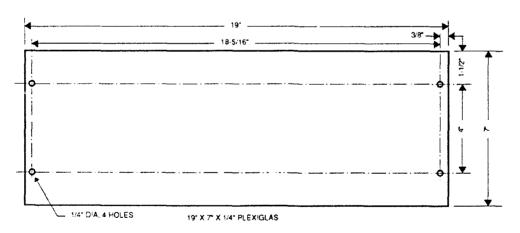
DOOR INTERLOCK SWITCH MOUNTING BRACKET
